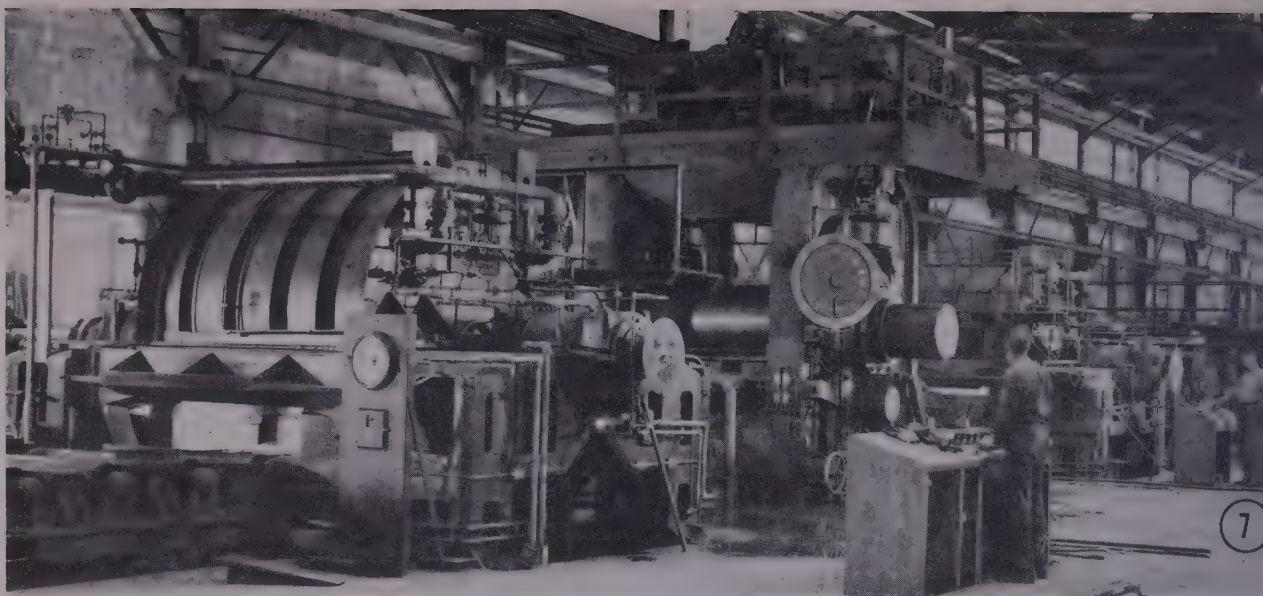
View of 54-inch, four-high, reversing finishing mill with its two hot up-coilers each located within a heating furnace
